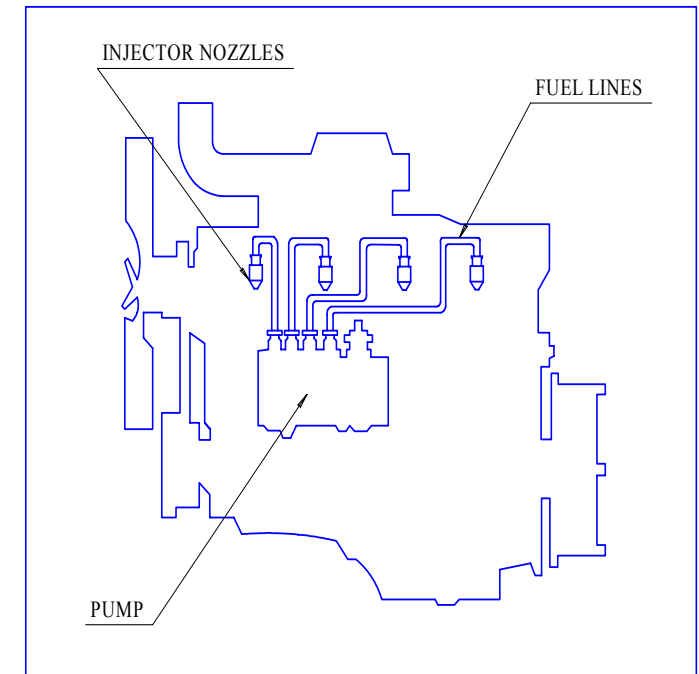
A diesel engine can be identified by the presence of an injection pump, fuel lines, and injection nozzles.
